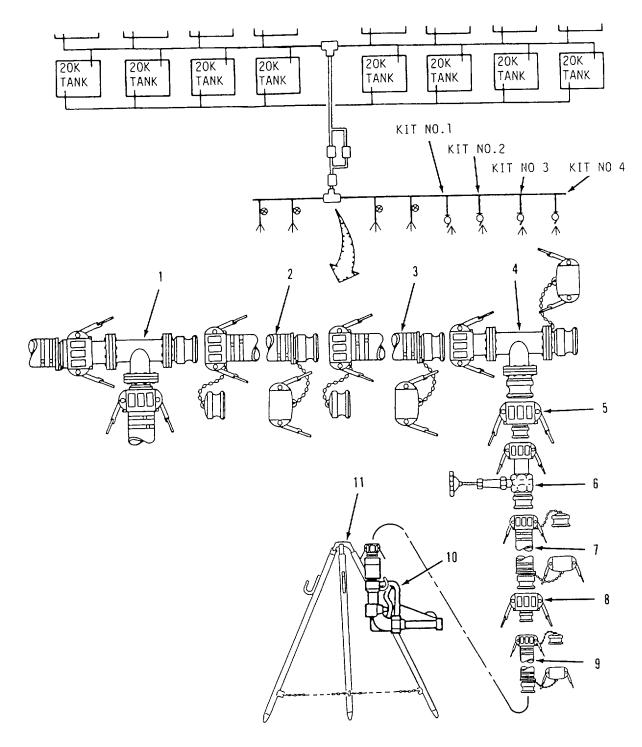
Hose Nozzle Connection Kit Disassembly.
